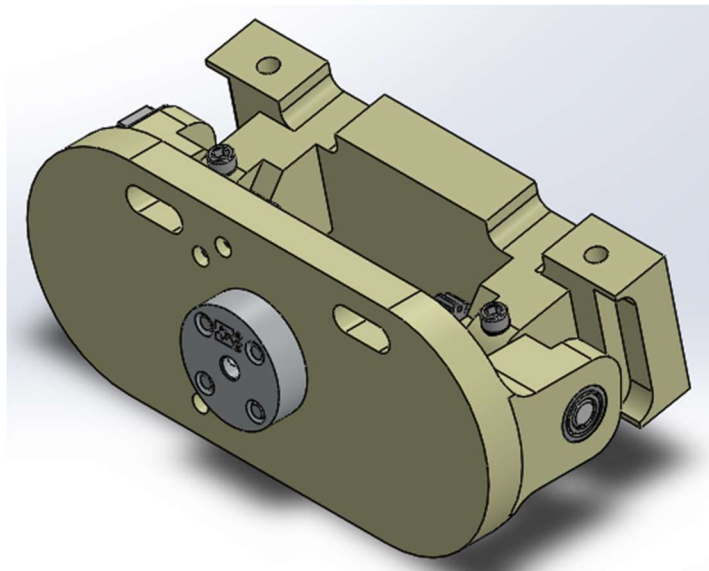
Bottom view of the wrist, showing universal mounting hub for forearm connection.
